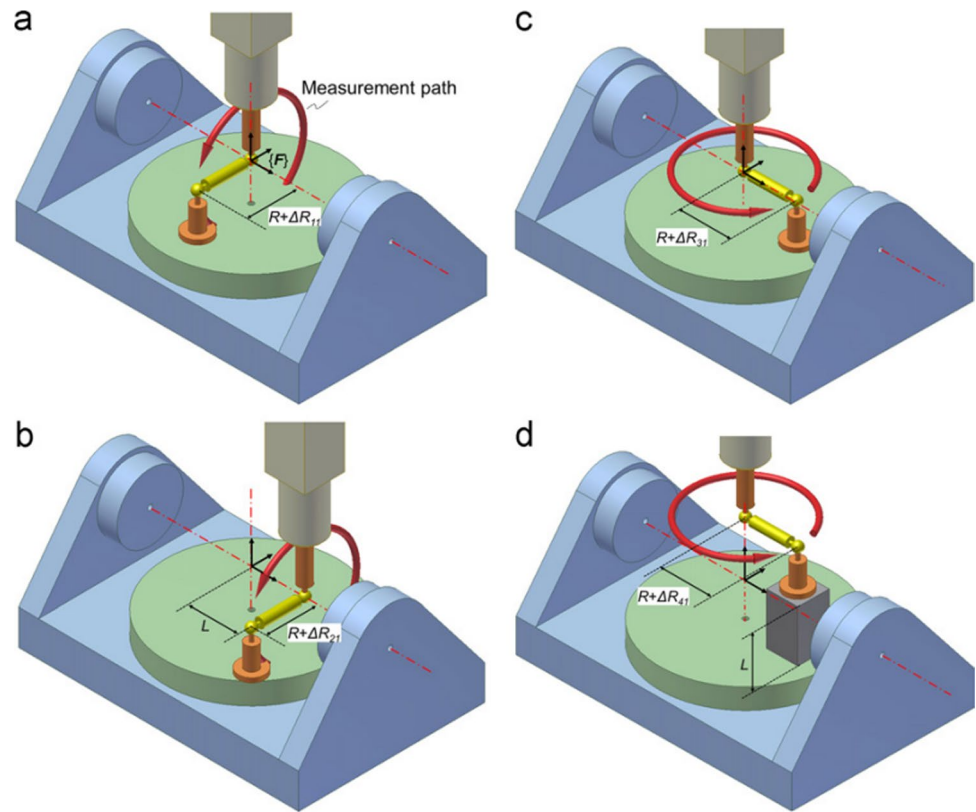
Ball-bar measurement of five-axis machine tools [115]
